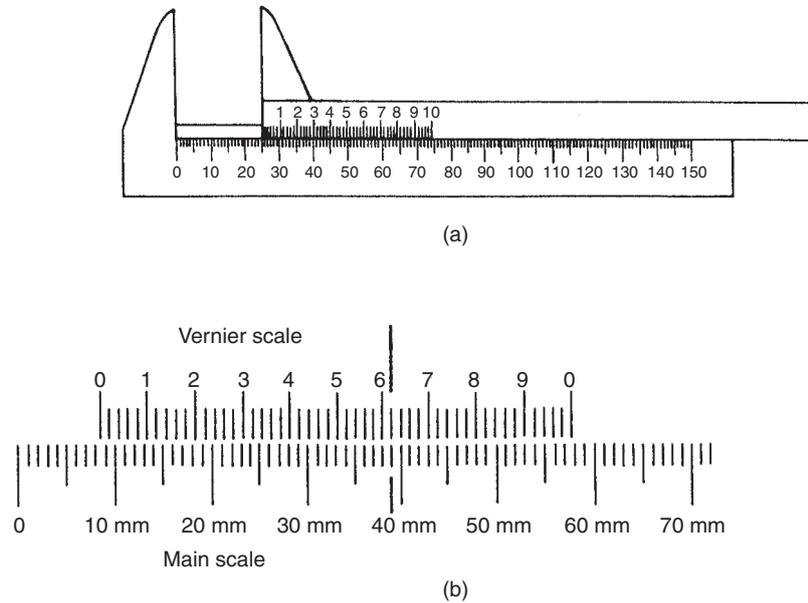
Vernier calliper: (a) basic instrument; (b) details of scale.
